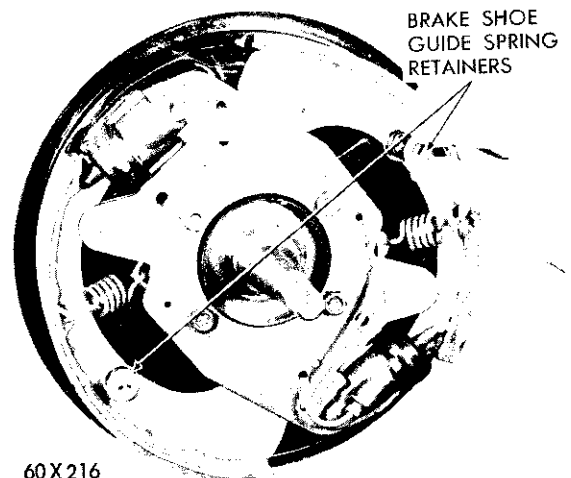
Removing or Installing Brake Shoe Guide Spring Rod and Retainer
